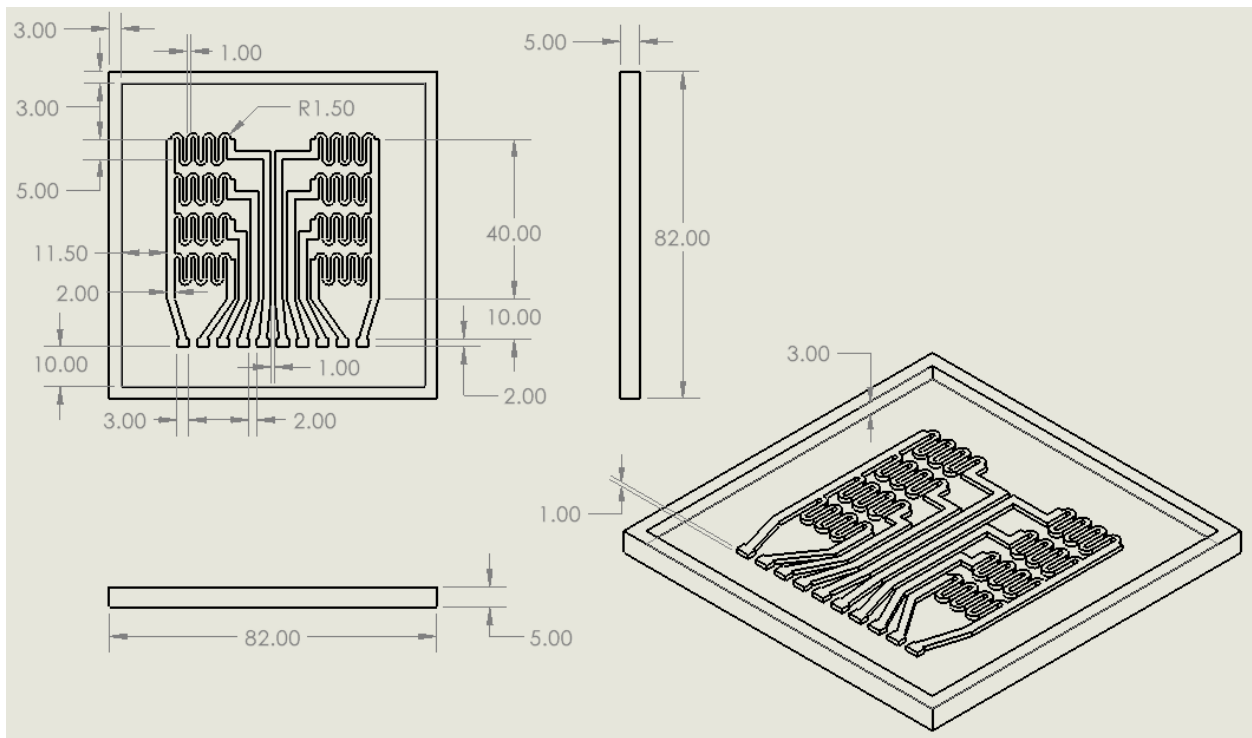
Sensor Mold Design with Measurements: The Solidworks part measurements and design sheet for the 3D sensor mold. (Ghatnekar et. al. 2022)
